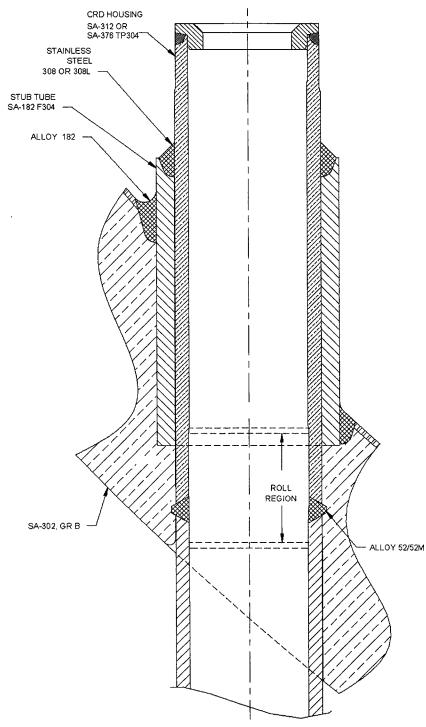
BWRVIP-58-A CRDH Internal Access Weld Repair
